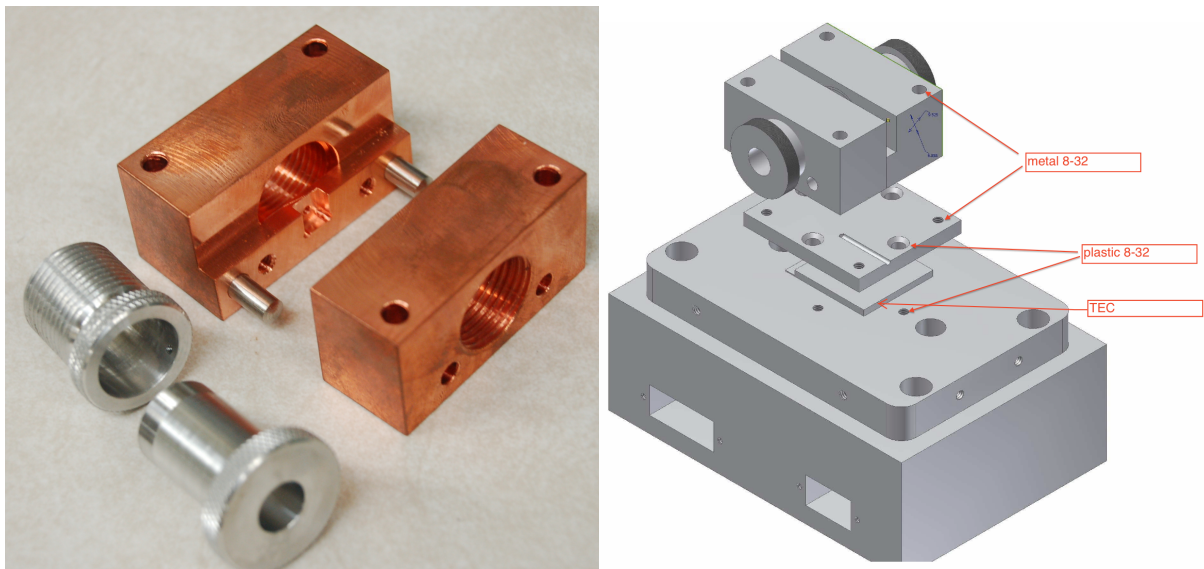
Construction of the tapered amplifier housing. In the photograph (left), an asphere is installed in the lower aluminum collimation tube, which then mates with fine threading into the larger aluminum tube. The larger aluminum tube then coarsely mates into the copper piece. The fine threading provides control over the focusing of the seed light, and collimation of the output.
